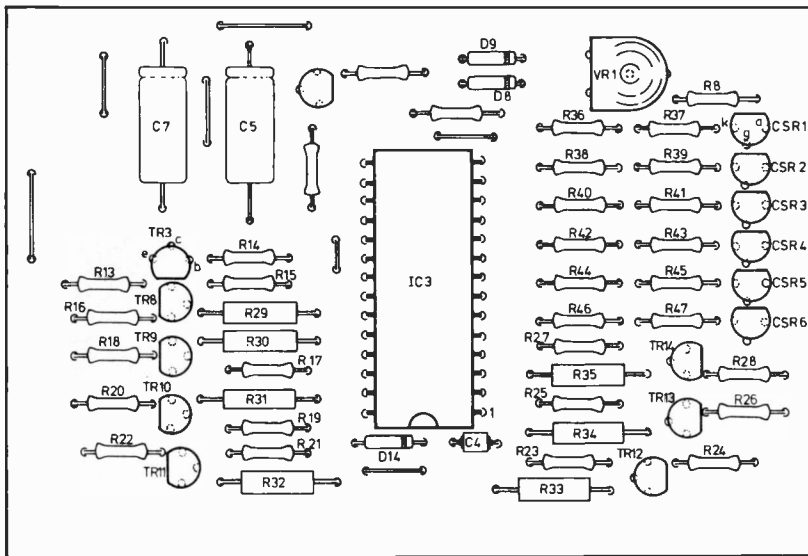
Clock circuit board PCB2 component layout. (Alarm circuit components are not annotated—details next month.)
